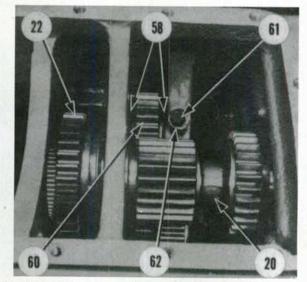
View of top of transmission showing reverse idler gear and mainshaft.
